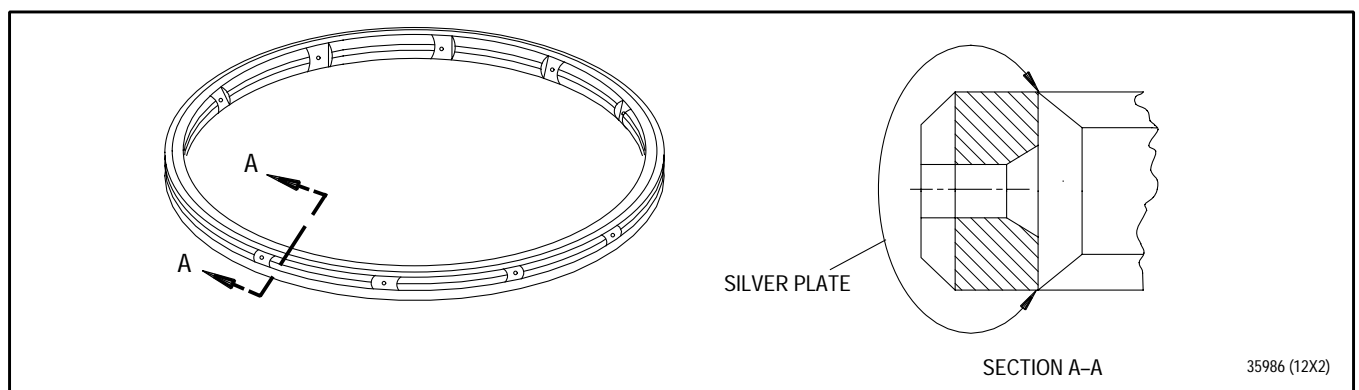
Bearing Retaining Nut (PN 4002513) - Inspection
